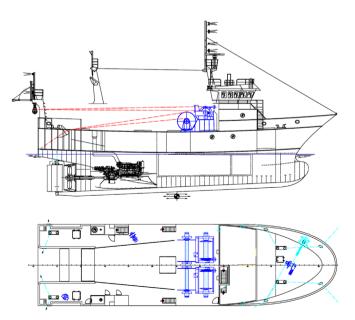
Coastal Trawler. Longitudinal cross-section of the winch and bridge. *Source*: author's own.
